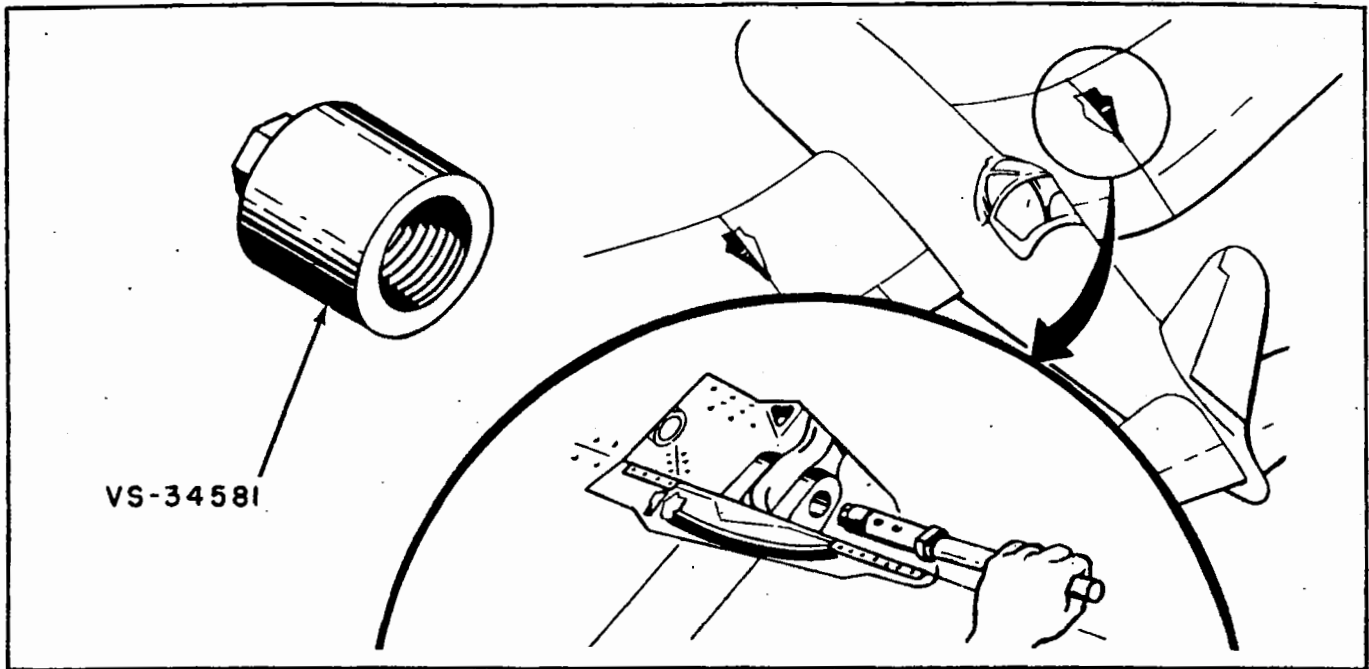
Bolt Pilot — Used for Installing Main Wing Hinge Nut.
